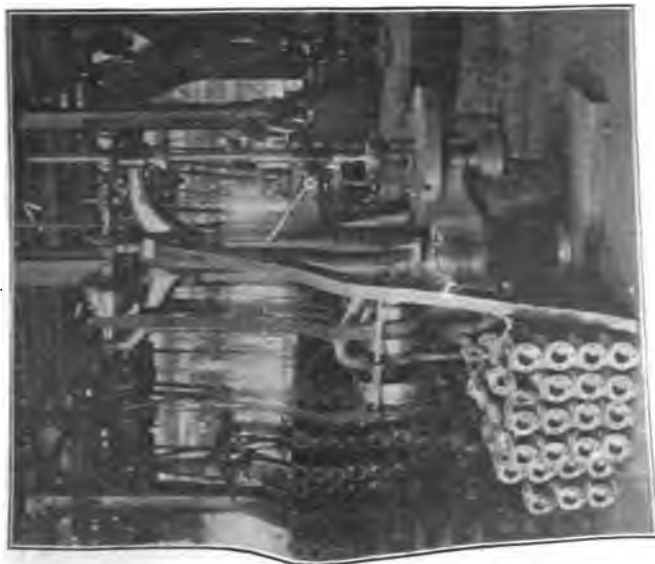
COMPRESSED AIR CLAMP TO HOLD PIPE BEING OPERATED UPON.
